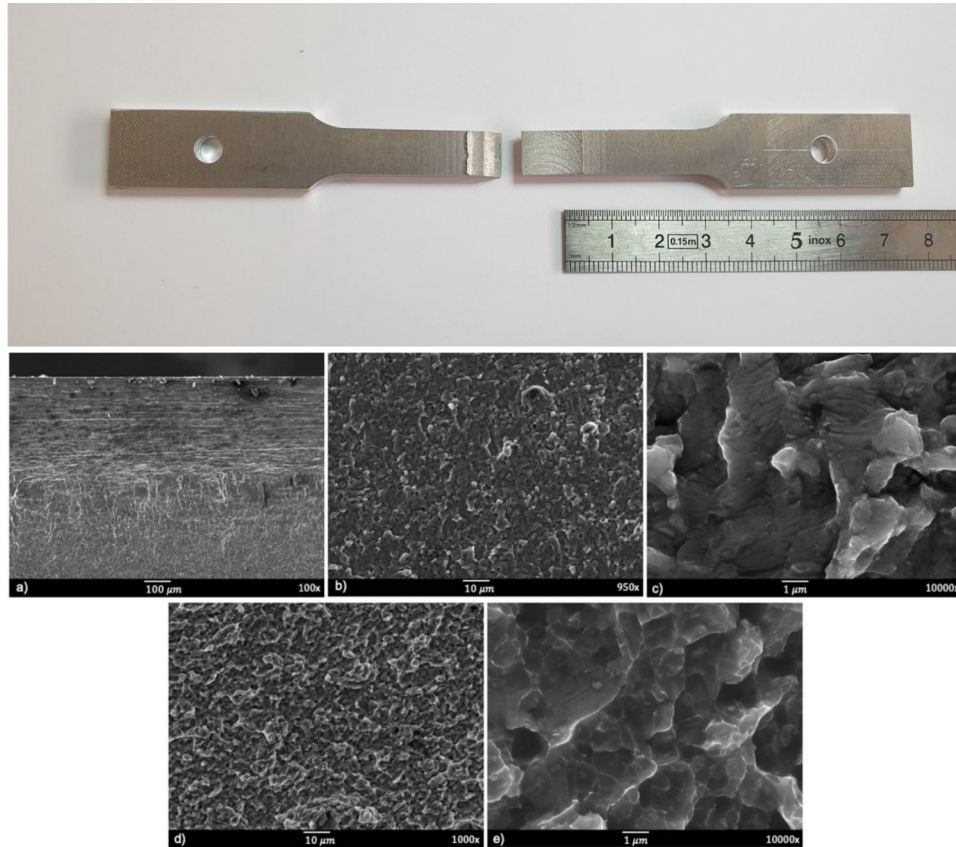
Fractographies of a specimen tested with $R = 0.5$ and $T = 23\text{ °C}$: a) crack initiation region, b) crack propagation region, c) fatigue striations, d) final fracture region with visible dimples, e) detail of d).
